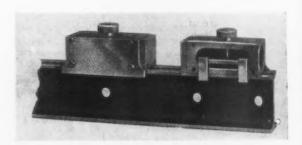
(Left)—The Comtorgage Is for Accurate Measuring of Outside Diameters. Among other uses, it may be employed for inspection of bars and tubing.
